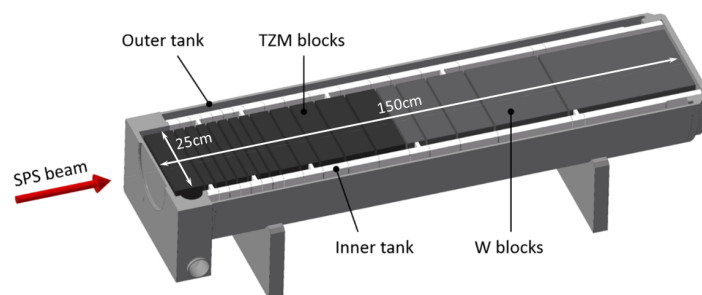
Preliminary target assembly layout. The TZM and tungsten blocks are housed in the inner vessel made of stainless steel, which embodies the target’s water cooling [56].
